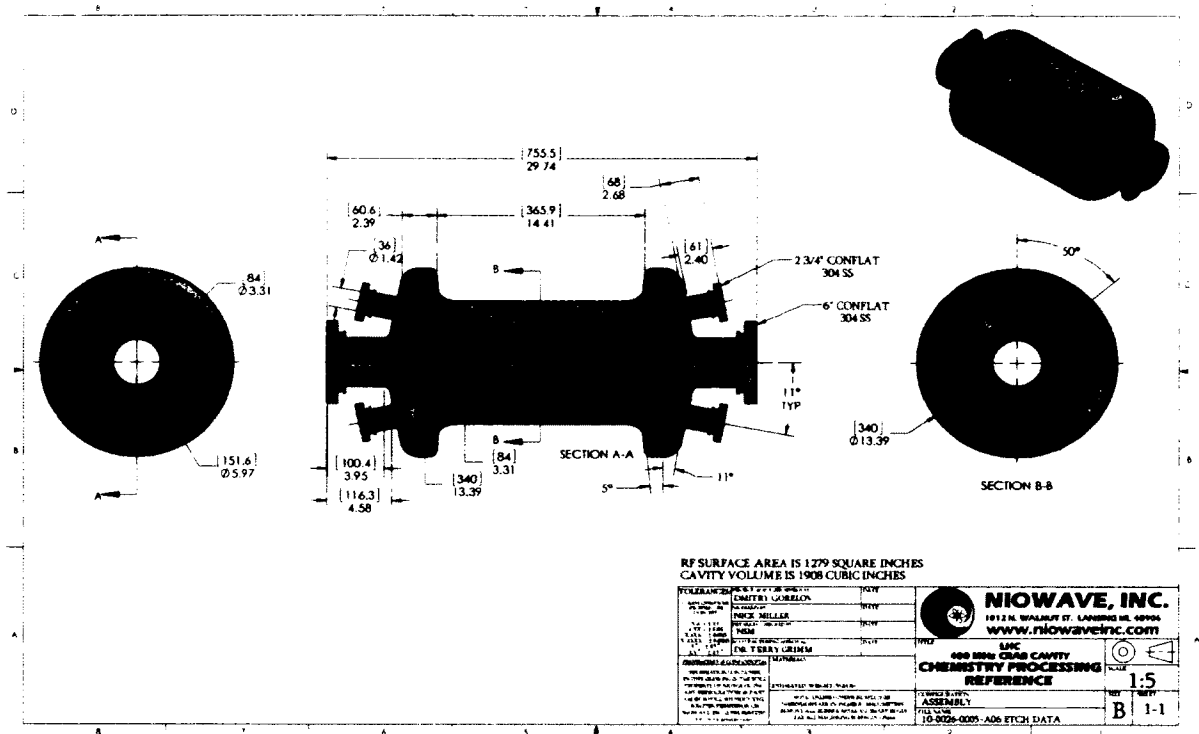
Fabrication drawing of the 400 MHz rf-dipole cavity.
